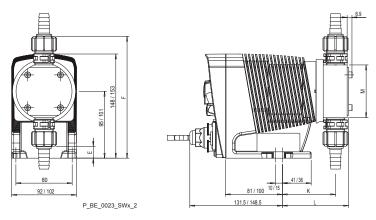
Dimensional drawing Beta b BT4b/BT5b, material version PV for highly viscous feed chemicals - dimensions in mm
